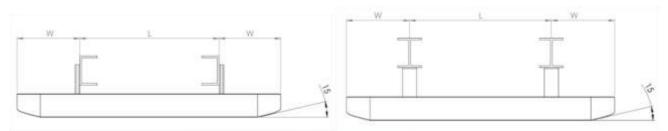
Front view illustrating the place of FUPD is fitted to the carrier bridge
